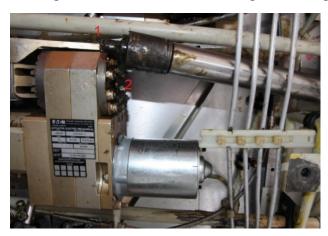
Photo of the actuator with the threaded part of the rod (1) separated from the gearbox (2)
